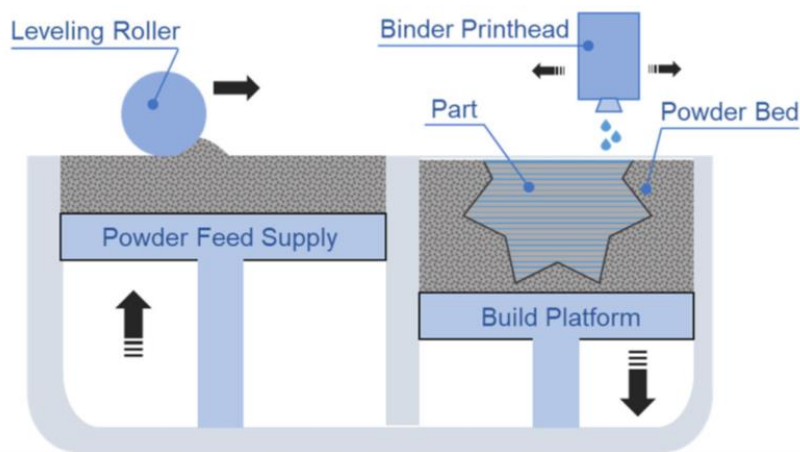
The schematic illustration of the printing step in BJ manufacturing process [13]
